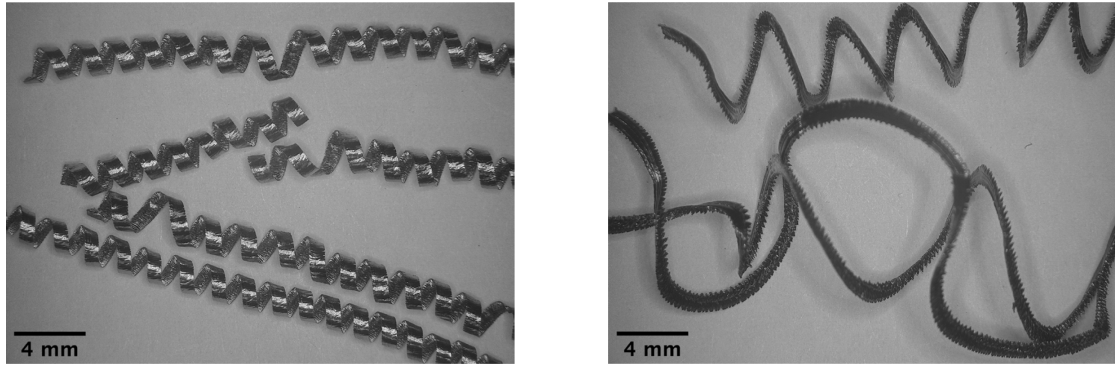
Chips produced under cryogenic conditions with a new tool (left) and a worn tool (right)
